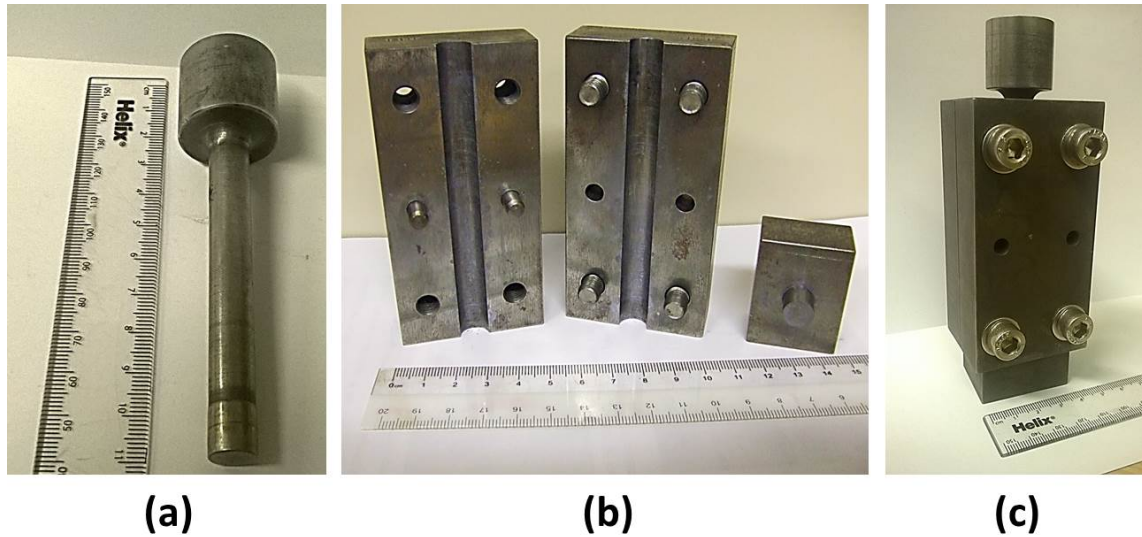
4 (a) Plunger, (b) split mould and (c) assembled mould.
